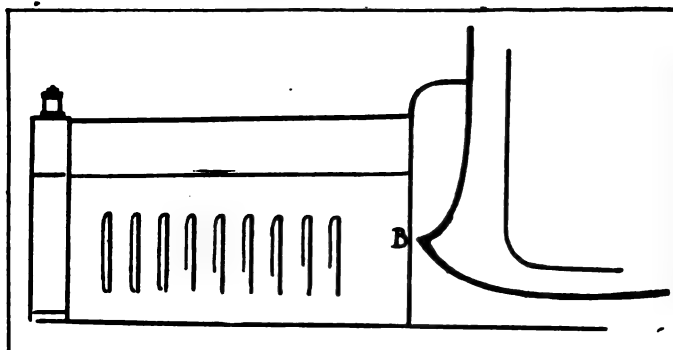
Lower, Pointed Door or Body Hook Just Back of Hood.
